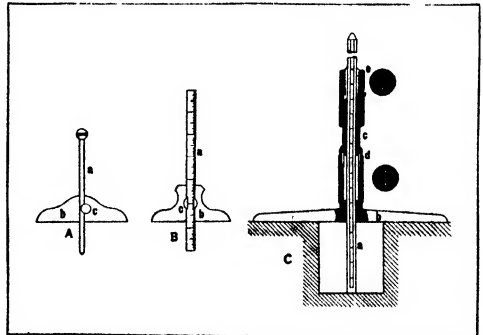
DEPTH GAUGES: (A) PLAIN ROUND ROD a, SLIDING IN HEAD b, AND PINCHED WITH SCREW c; (B) GRADUATED RULE a, SLIDING ON HEAD b, IN GROOVED HEAD OF CLAMPING SCREW c; (C) SLOCOMB DEPTH GAUGE, FITTED WITH MICROMETER, a ROD, SLIDING IN HEAD, b, o HUB, d THIMBLE CORRESPONDING WITH SIMILAR DIVIDED PARTS IN MICROMETER CALIPERS, e CLAMPING SCREW
